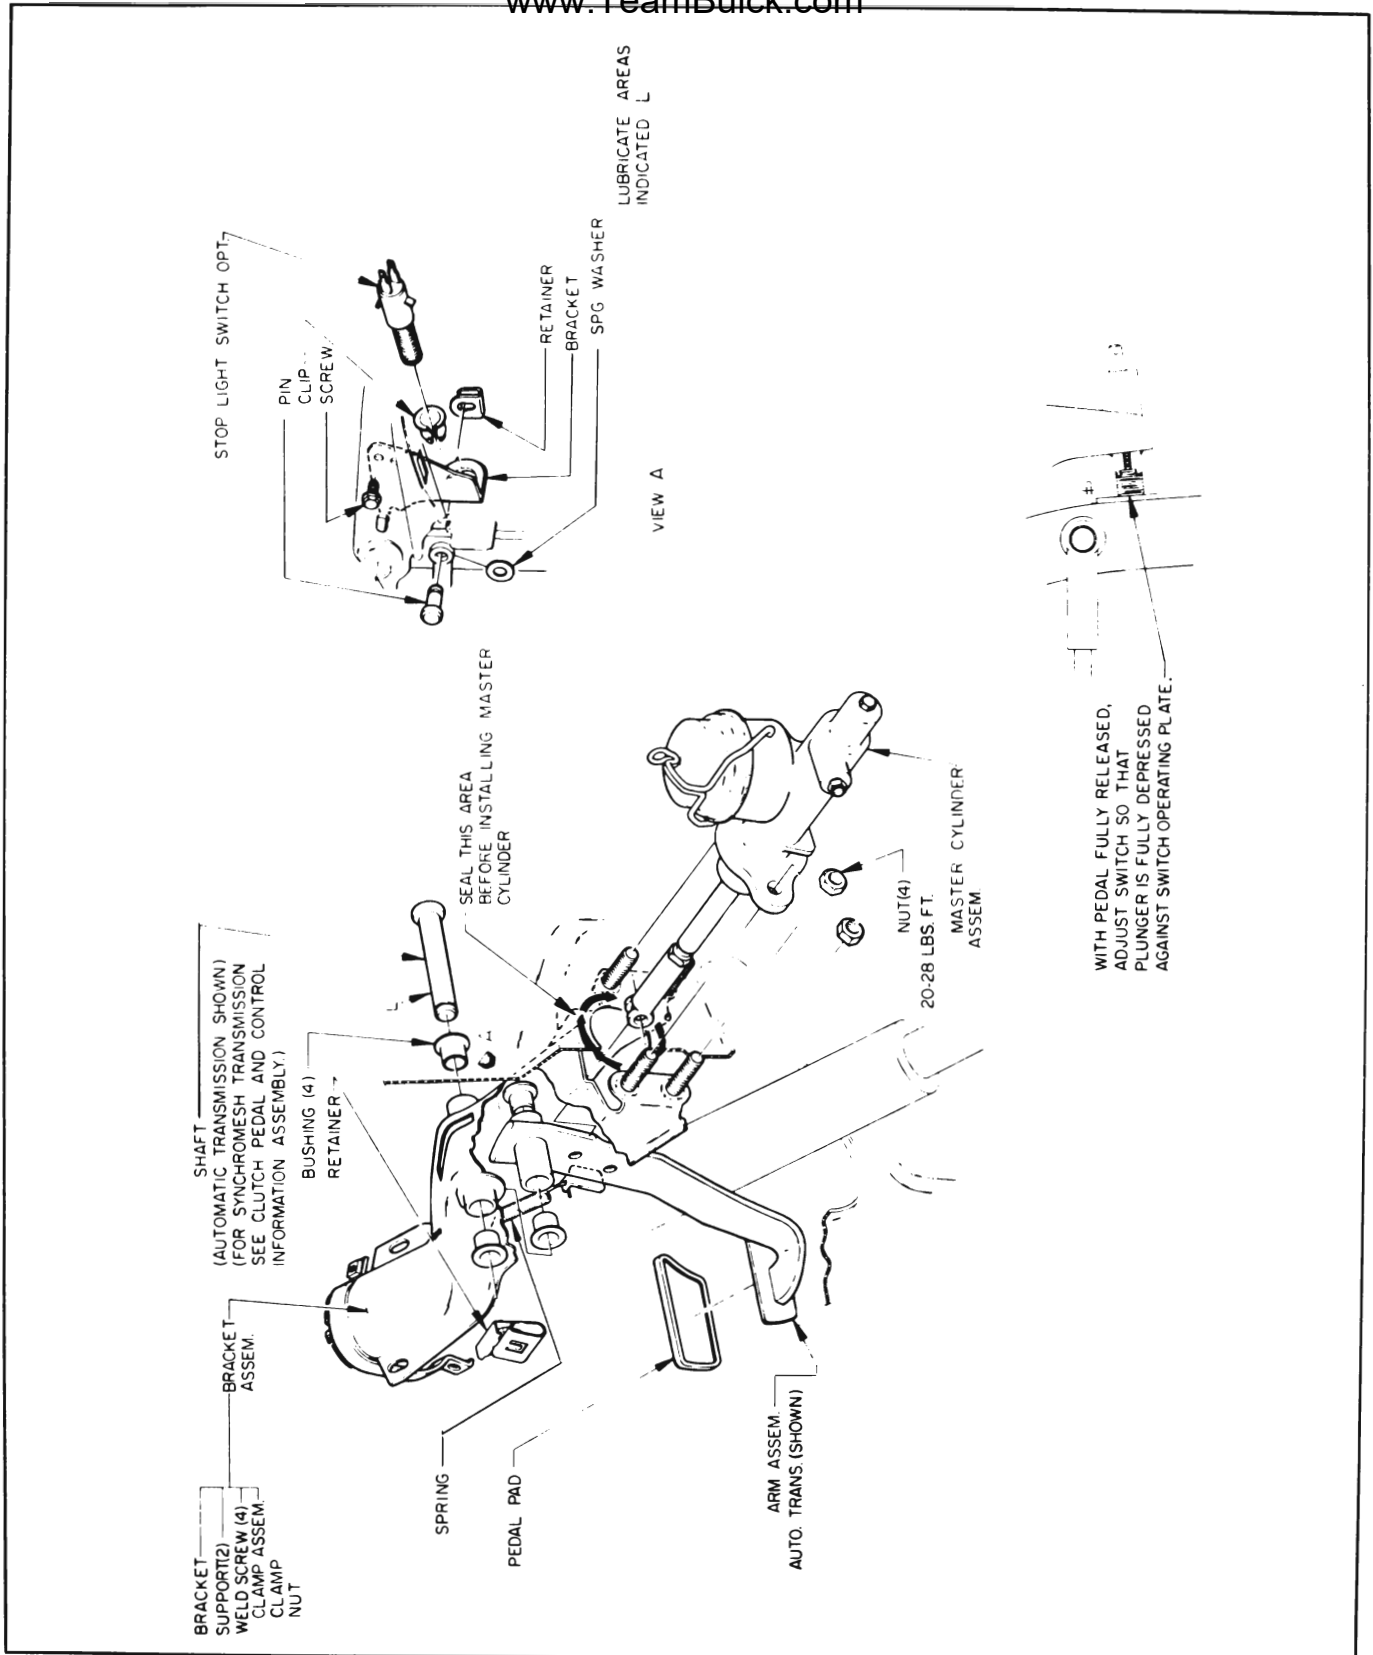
Mounting of Brake Pedal and Master Cylinder
